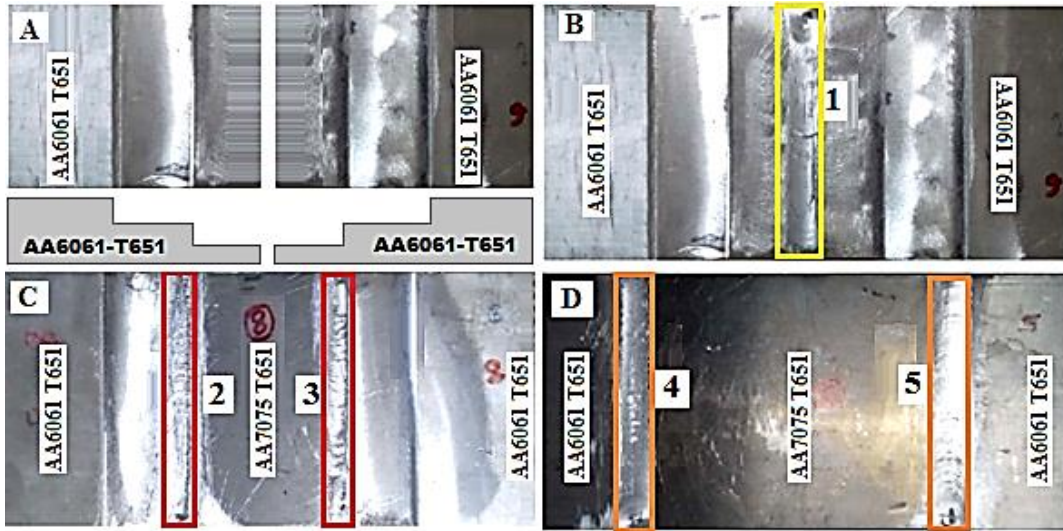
Steps followed in MM-FSW, (A) Stepped section of base AA6061-T651 Plate, (B) First butt-joint welded region at point 1. (C) AA7075-T651 alloy plate was inserted above the welded base plate and welded at region 2 and 3, (D) Final another AA7075-T651 plate insertion over the first 7075-T651 welded plate and welded at points 4 and 5
